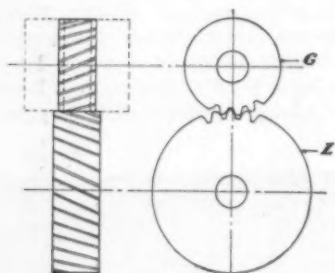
Parallel axis lapping using oscillating motion parallel to the axes of gears being run together.
